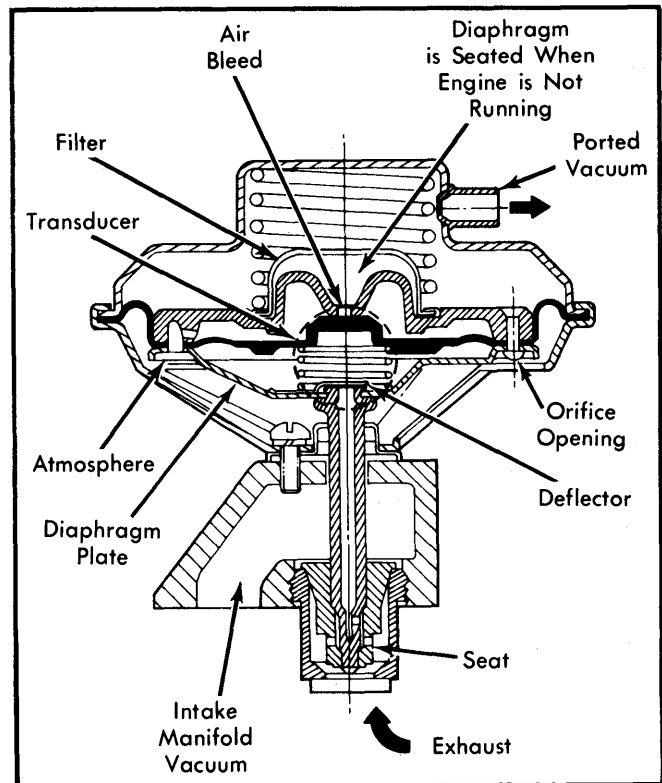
Cutaway View of Negative Transducer Back Pressure EGR Valve
